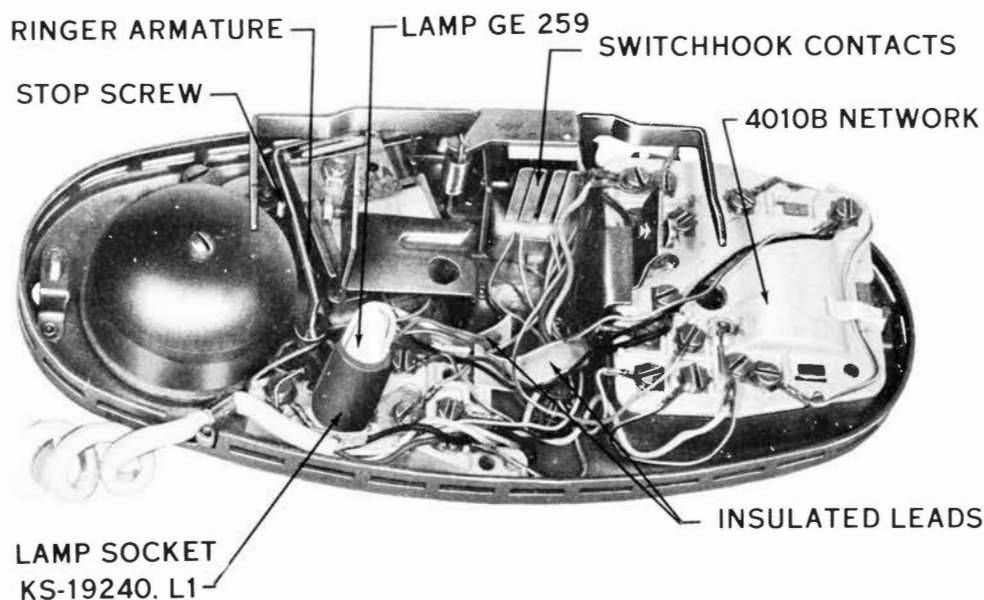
1702-Type Telephone Set, Dial and Housing Removed
